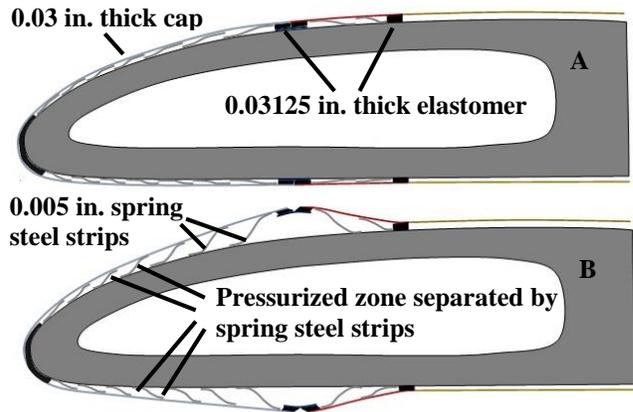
Initial prototype pneumatic deicing design show in deployed (B) and undeformed (A) states. Deflection is exaggerated.
